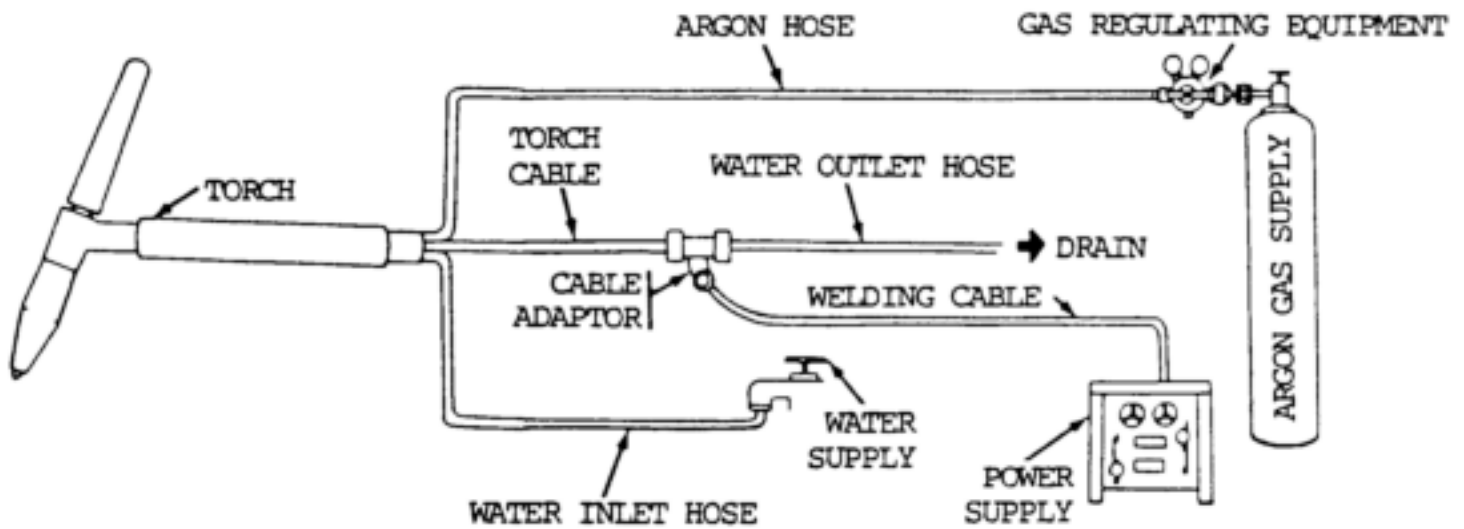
Gas tungsten-arc welding setup.
